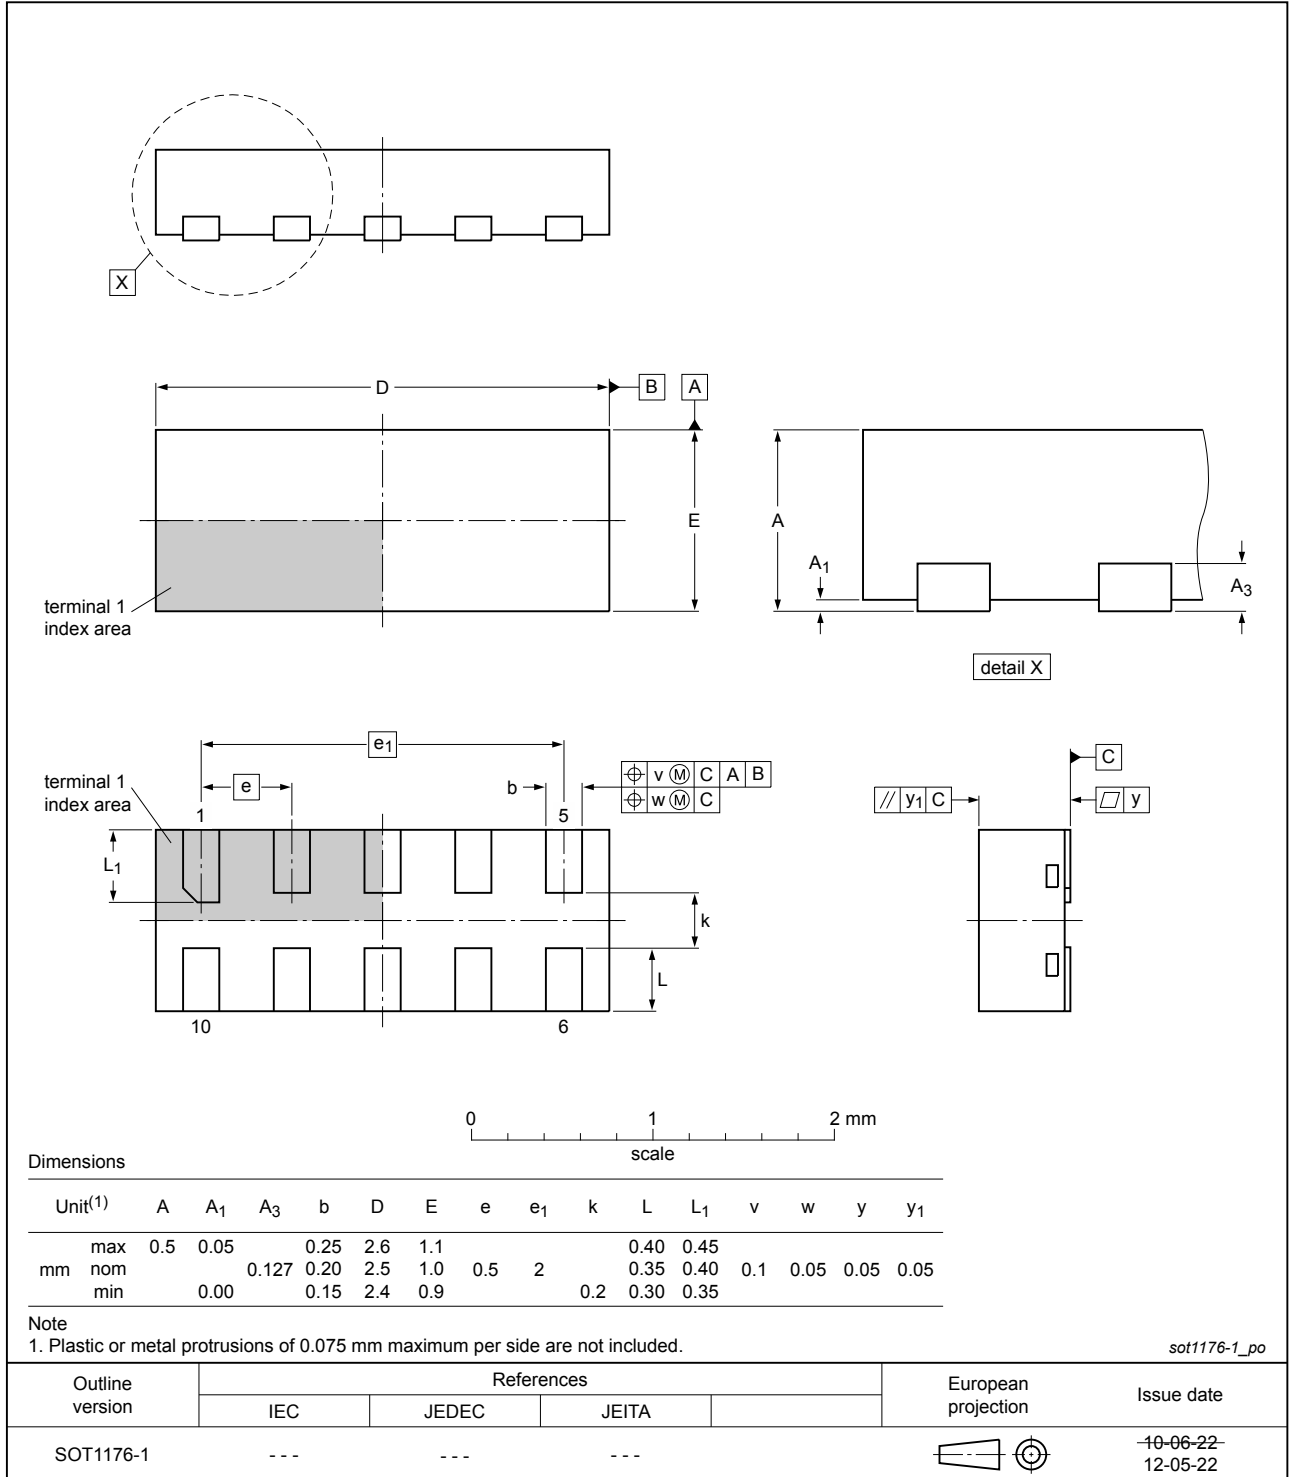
Package outline DFN2510A-10 (SOT1176-1)
